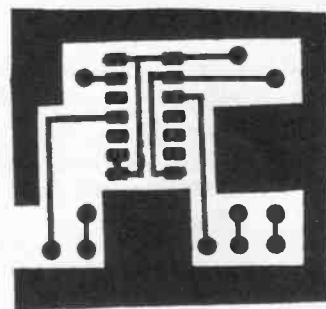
(right): PCB layout for the display unit. Scale 1:1.
